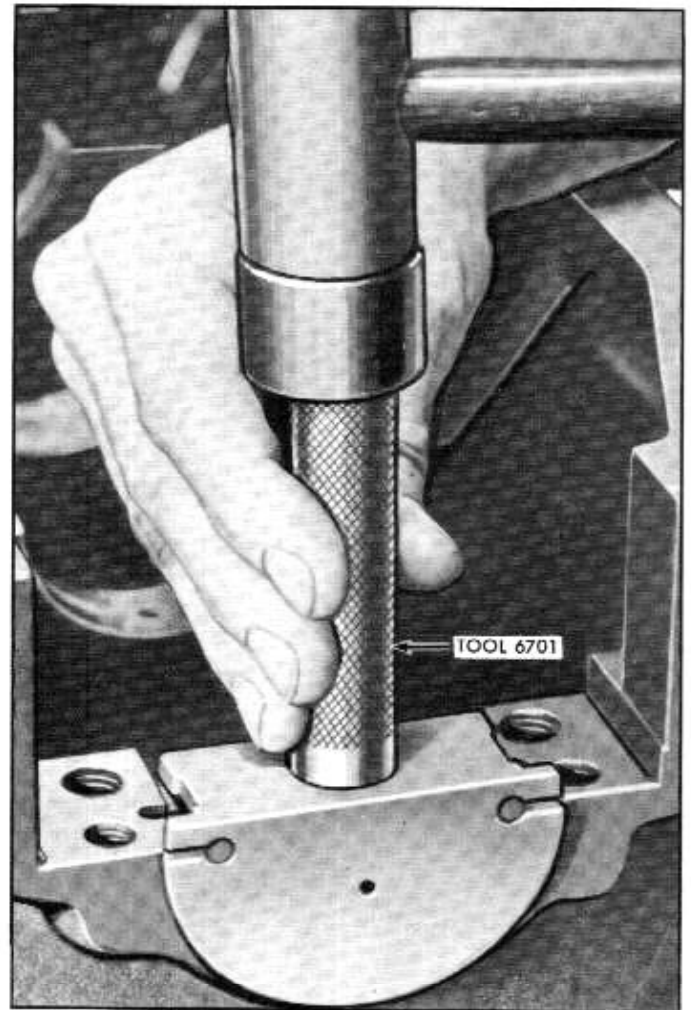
C-137—Installing Rear Crankshaft Oil Seal
